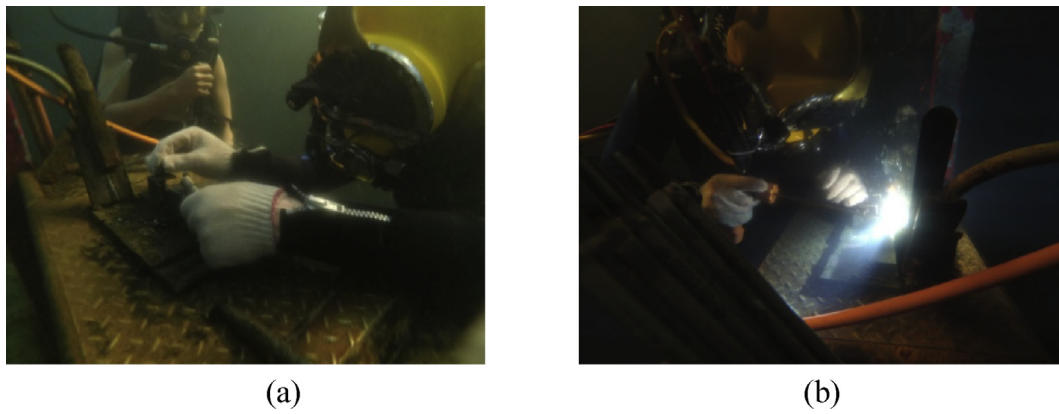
Underwater welding (a) preparation (b) process.
